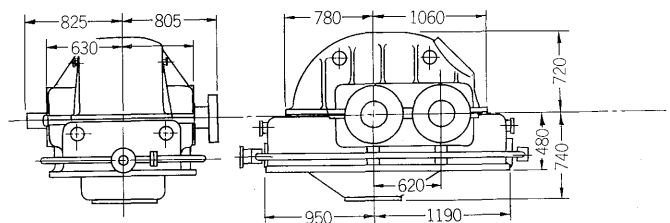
Outer dimensions of the high speed, high power reduction gear
